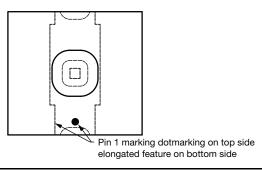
Issue: prel.; 02.11.2020 Not indicated tolerances  $\pm 0.1$
